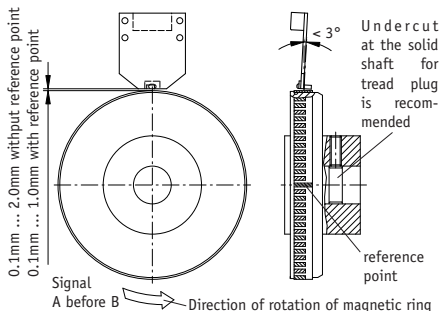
Definition of the counting direction with magnetic strip and assemblage sensor/magnetic strip, gap measure, tolerances
